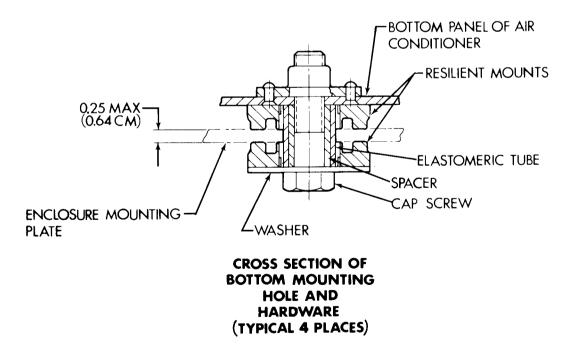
Installation Dimensions (Sheet 3 of 3)
